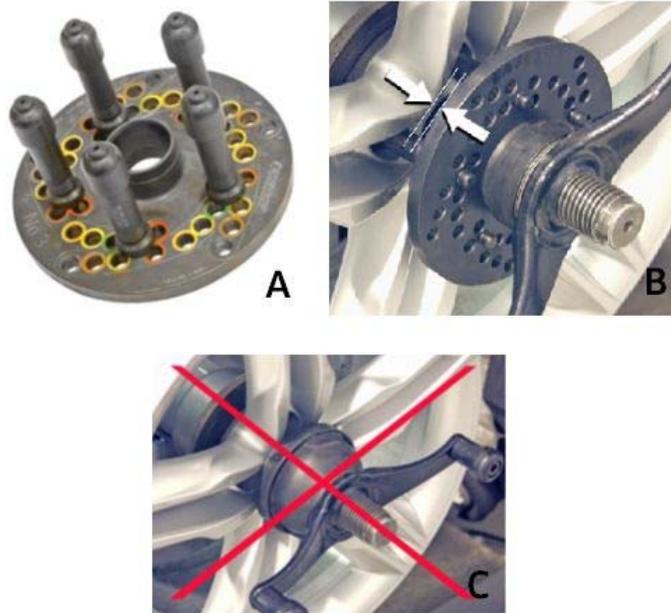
Five-finger style clamping plate (A), wheel properly mounted with a five-finger style clamp (B), and wheel mounted using a wrong clamping tool/method (C).
